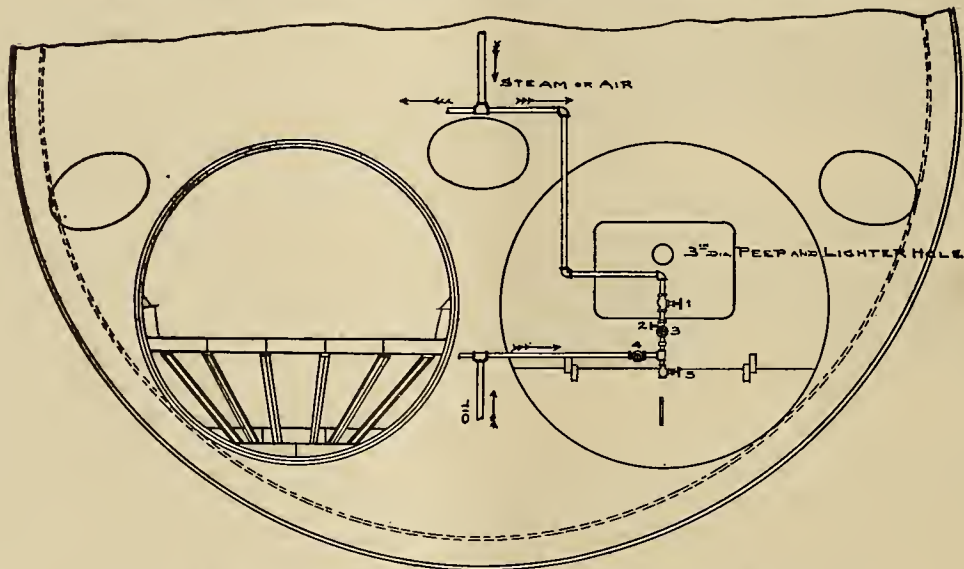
Cross Section of Burner Arrangement for Scotch Marine Boiler.
